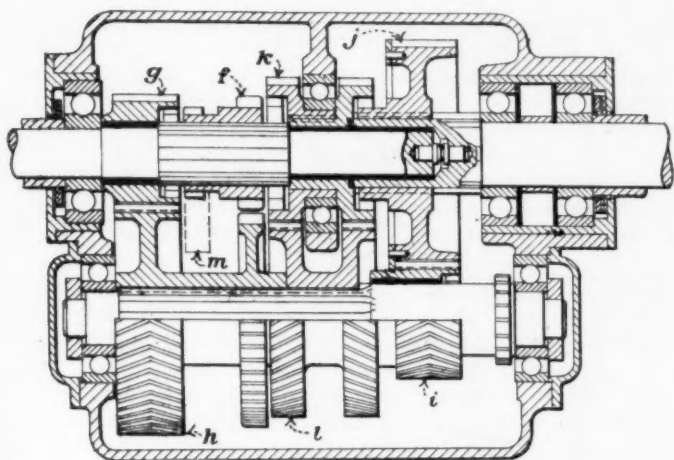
DOUBLE HELICAL GEARBOX SHOWING THE ARRANGEMENT OF THE GEARS FOR FIRST AND SECOND SPEEDS
